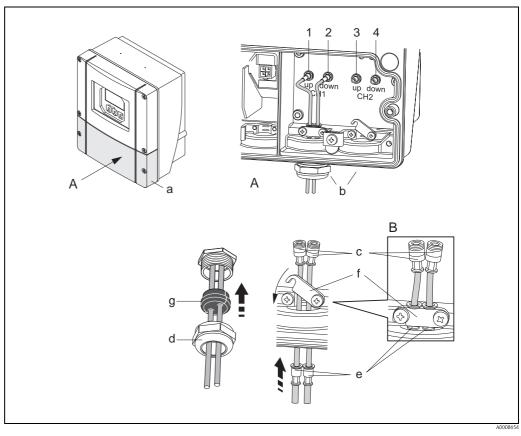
Connecting the connecting cable for sensor/transmitter (with cable gland for two connecting cables per cable entry)
